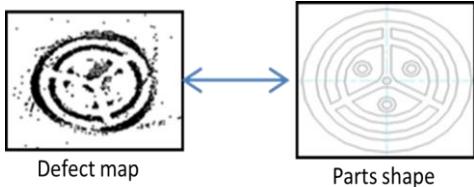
backside defect map is on the left, parts outline drawing is on the right
